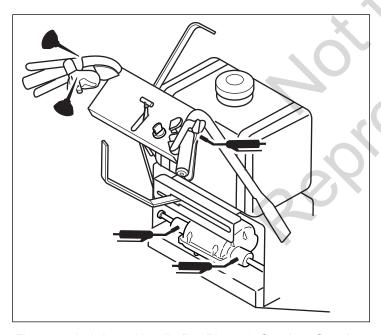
Lubricate Handle Bar Pivots & Gearbox Couplers
